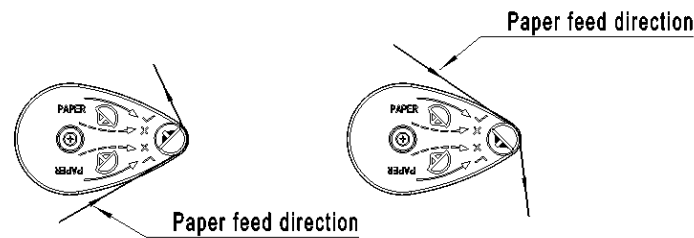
Paper passes by the buffer shaft while loading paper
